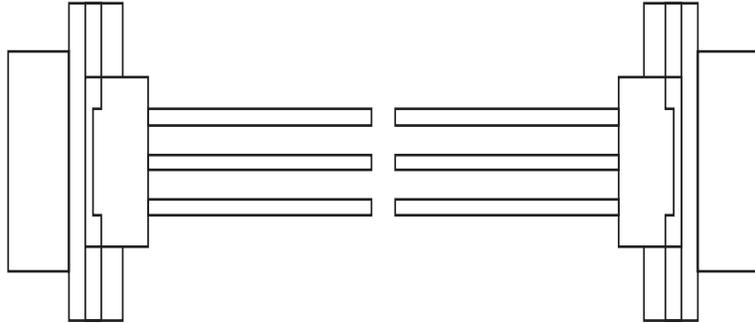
Extended Cable Assembly KS-23832 List 5
